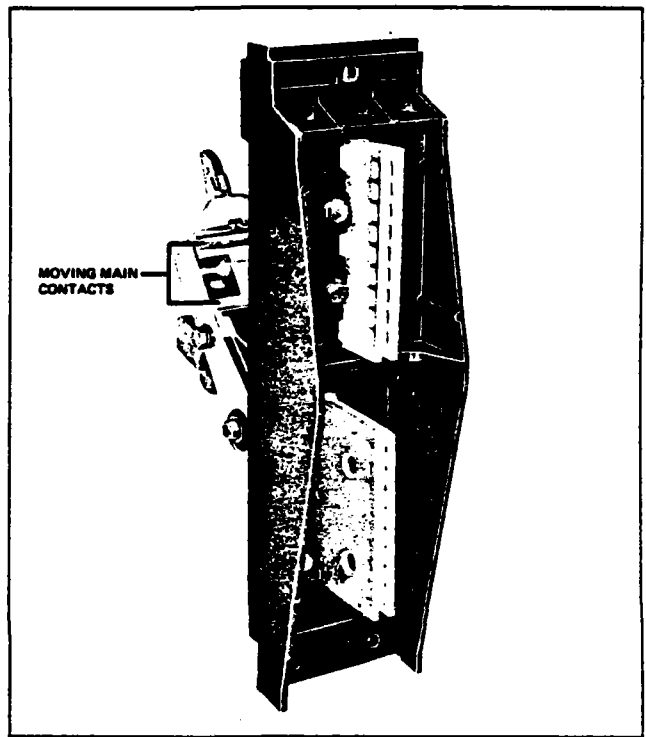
Type DS-632 Pole Unit Assembly - Rear View (391095)
